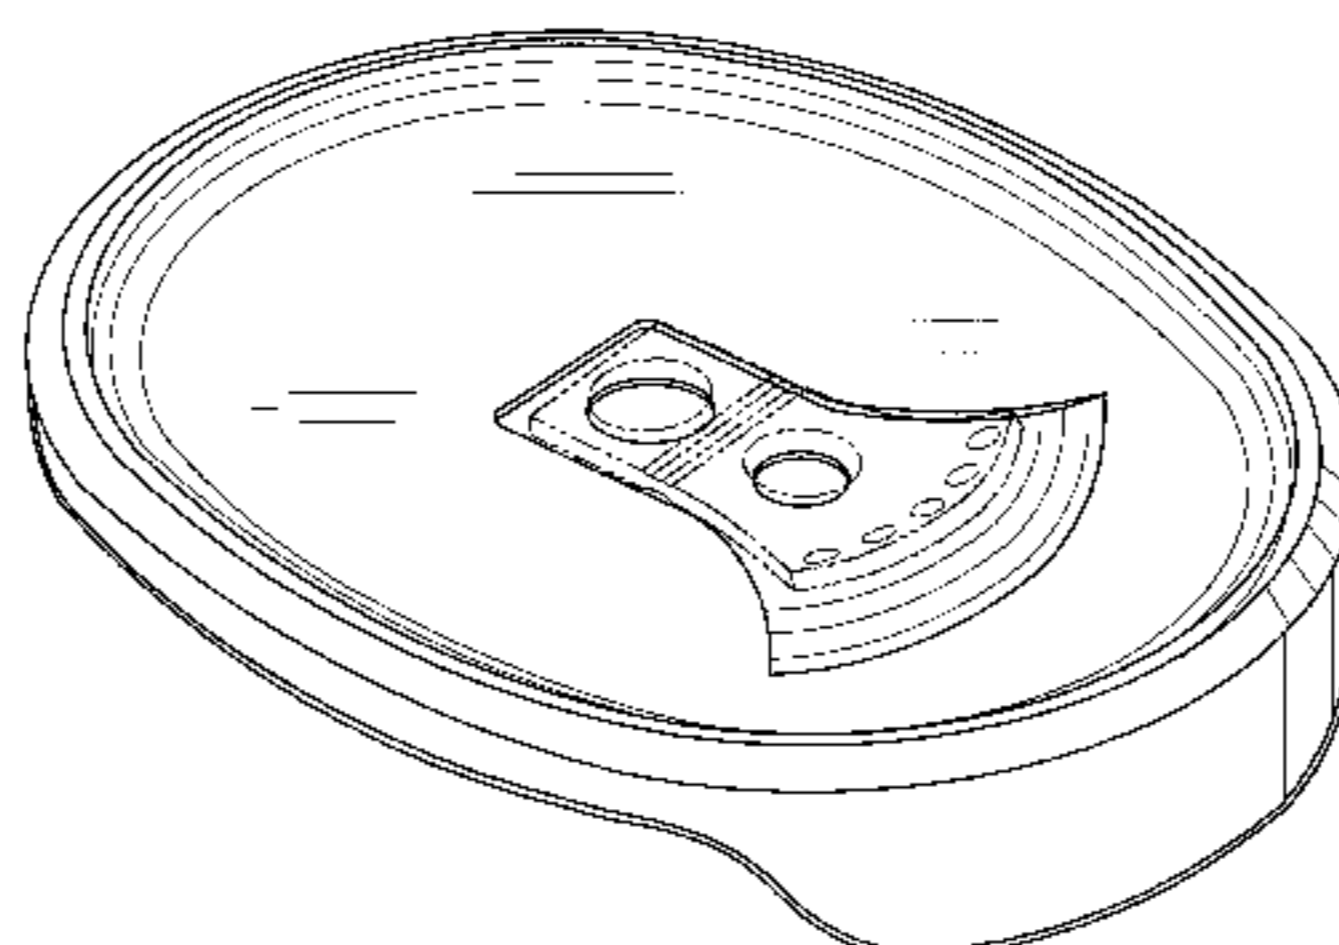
is a perspective view of a fourth embodiment of a container lid showing our new design, with the broken lines showing matter for illustrative purposes only and forming no part of the claimed design;
